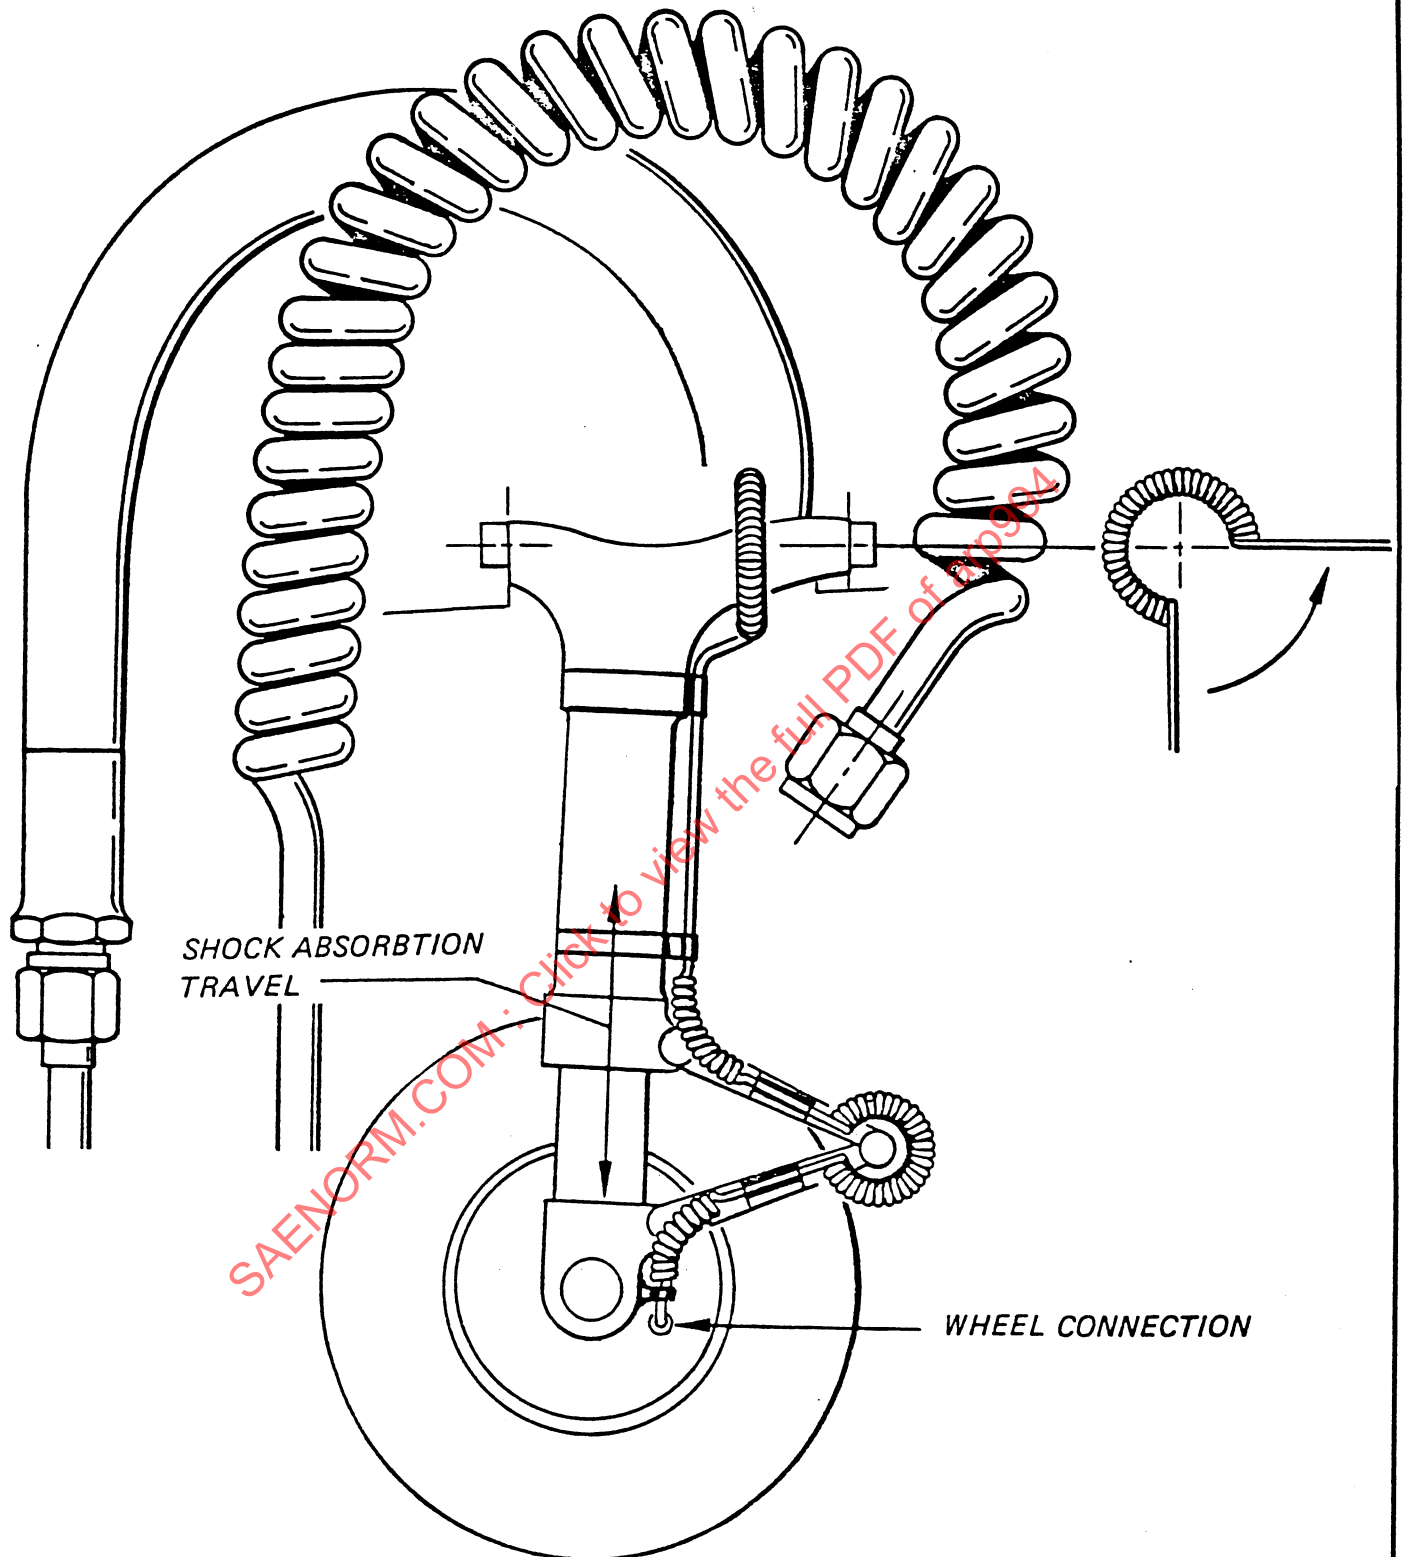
TIGHT SPIRAL BRAKE LINE INSTALLATION
